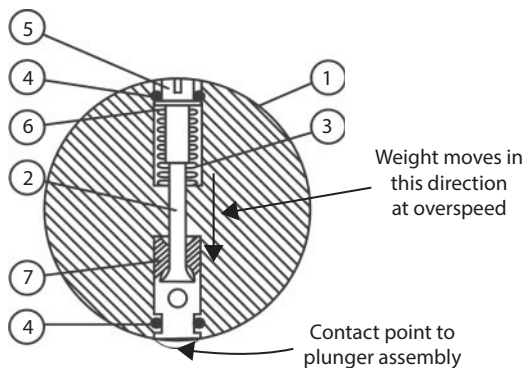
Spring-loaded pin or weight. 1. Body, 2. Pin, 3. Spring, 4. Lock U-Staple, 5. Adjustable nut, 6. Washer, 7. Auxiliary weight.
